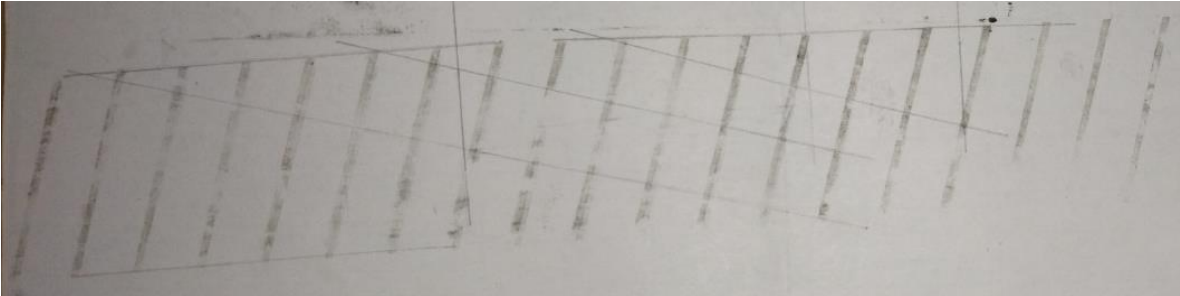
Development of the head circle of a gear of the streetcar gearbox
